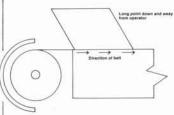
Remove pine and sawn edge on belt sander so that edge can be kept flat and straight. Always have the long point away from you.
